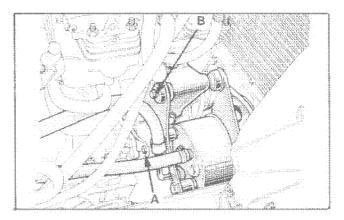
Pump tensioner (A) and pivot (B) bolts
